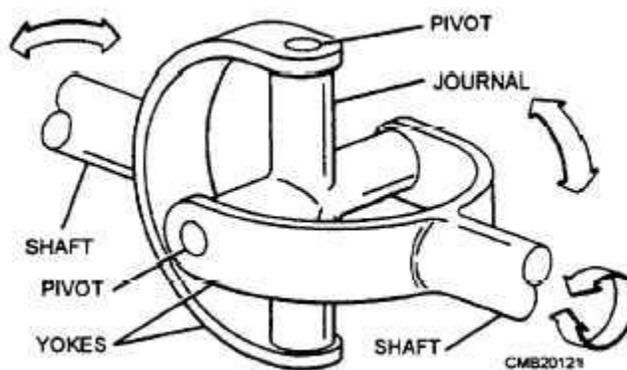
The Universal Joint. The cross within the joint is formed by the perpendicular intersection of the two journals at the center of the joint (Source: Cross and Roller Universal Joint, n.d.)
